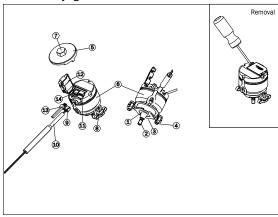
Assembly drawing for EKS36-2/EKM36-2 tapered shaft
